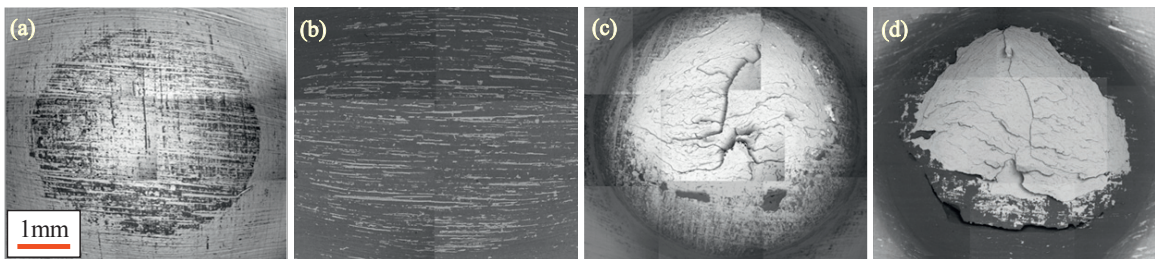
Backscattered electron composition image of fracture surface of (a) HT590 with 2.6 mm amount of punch indentation, (b) A2017P with 2.6mm, (c) HT590 with 5.6mm, (d) A2017P with 5.6mm.
